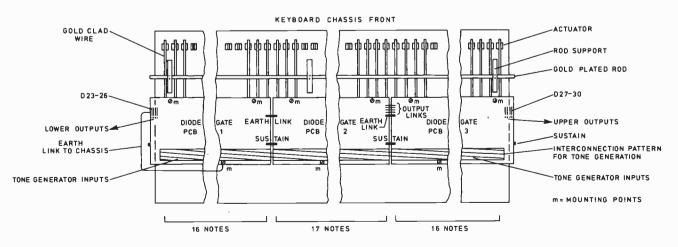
Assembly of Diode Gate p.c.b.s under Veroboard
